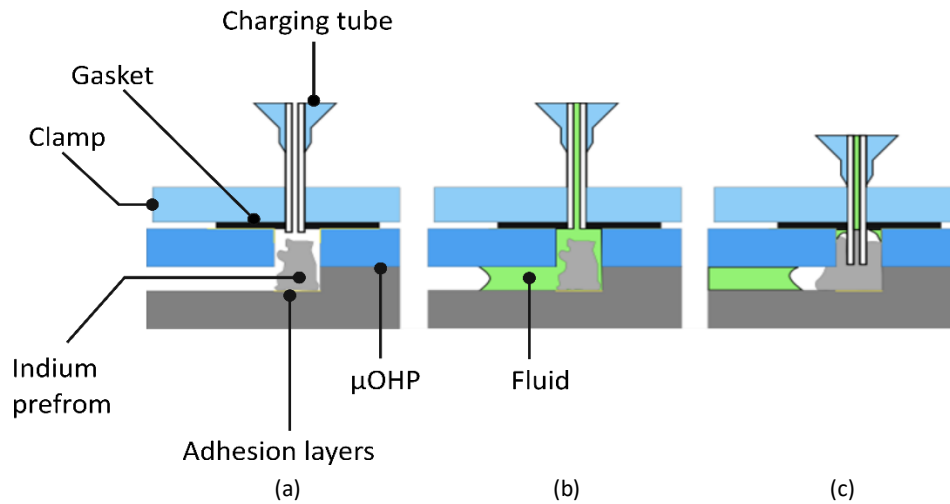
Schematic view of the procedure used for the initial Indium cold welding. (a) Tube's tip inserted through the flat gasket. (b) Fluid injection. (c) Indium deformation.
